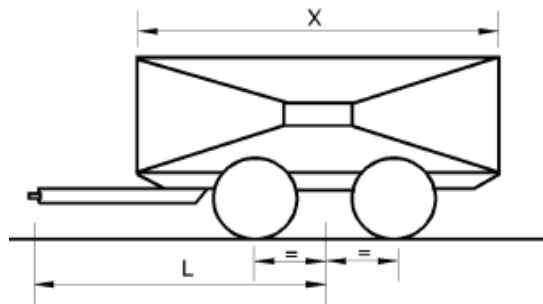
Ball coupling 80 type 80-652990, dimensions
